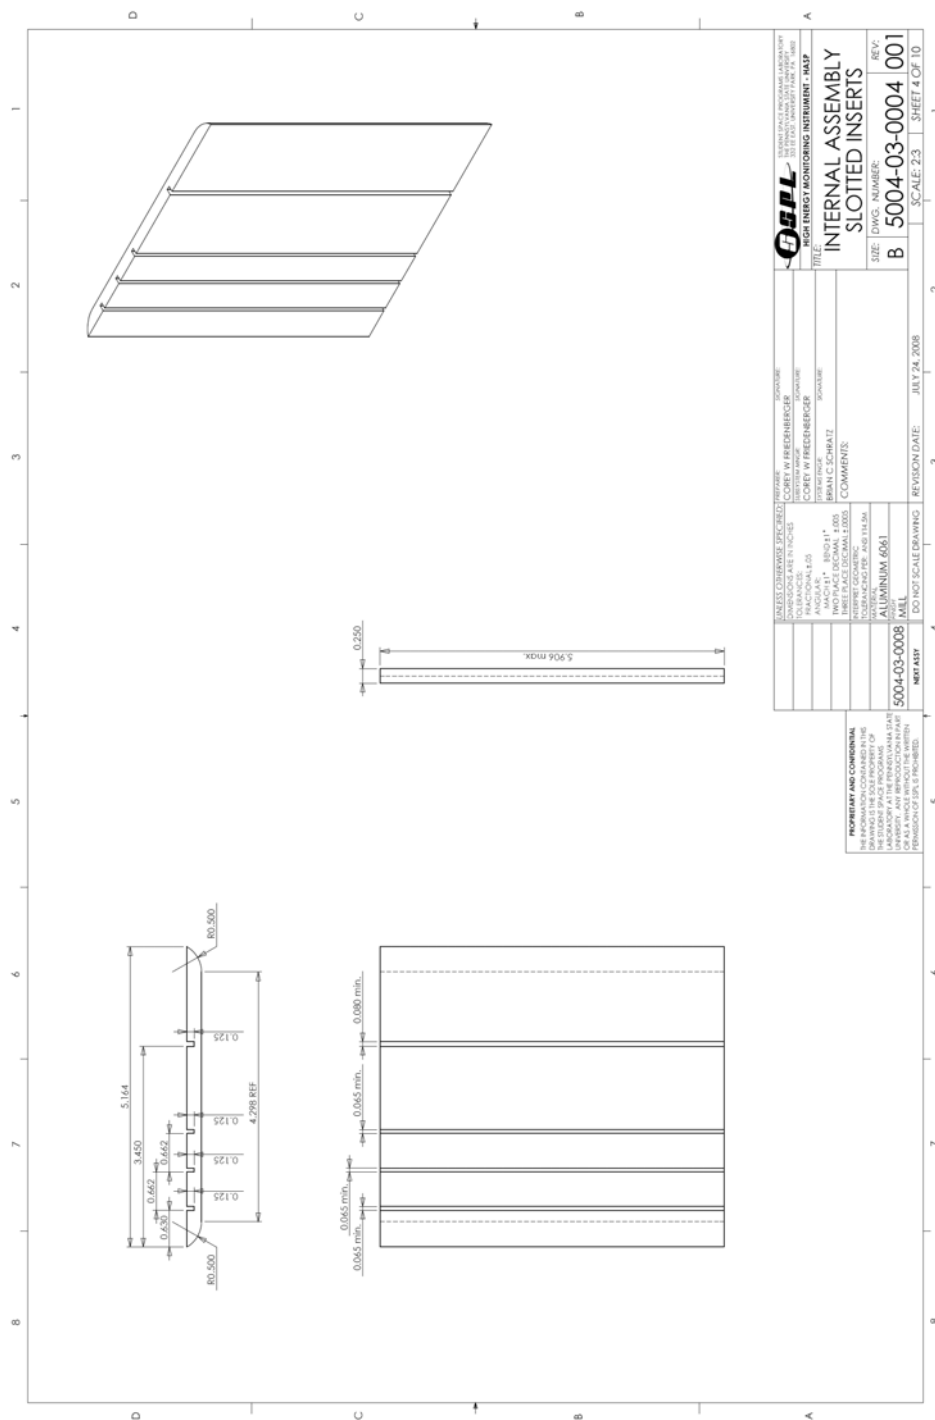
Mechanical Drawing: Internal Assembly Slotted Inserts
